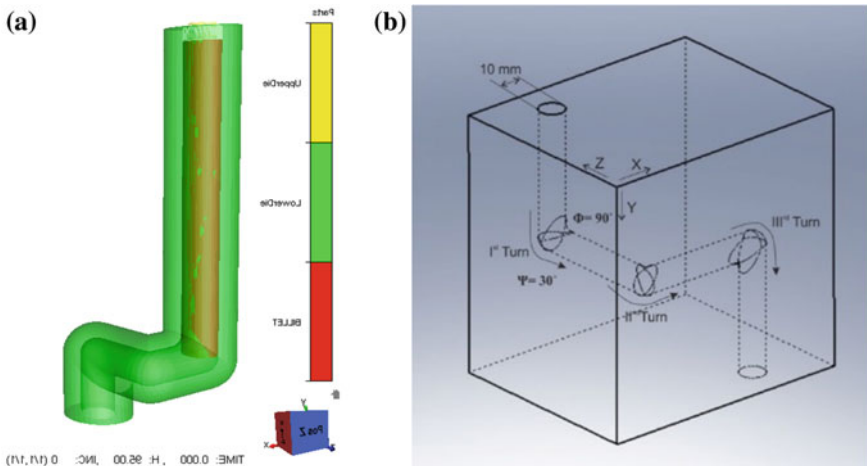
Schematics of a Three turn ECAP die assembled view in FORGE FE environment, b Isometric view of three turn ECAP die
